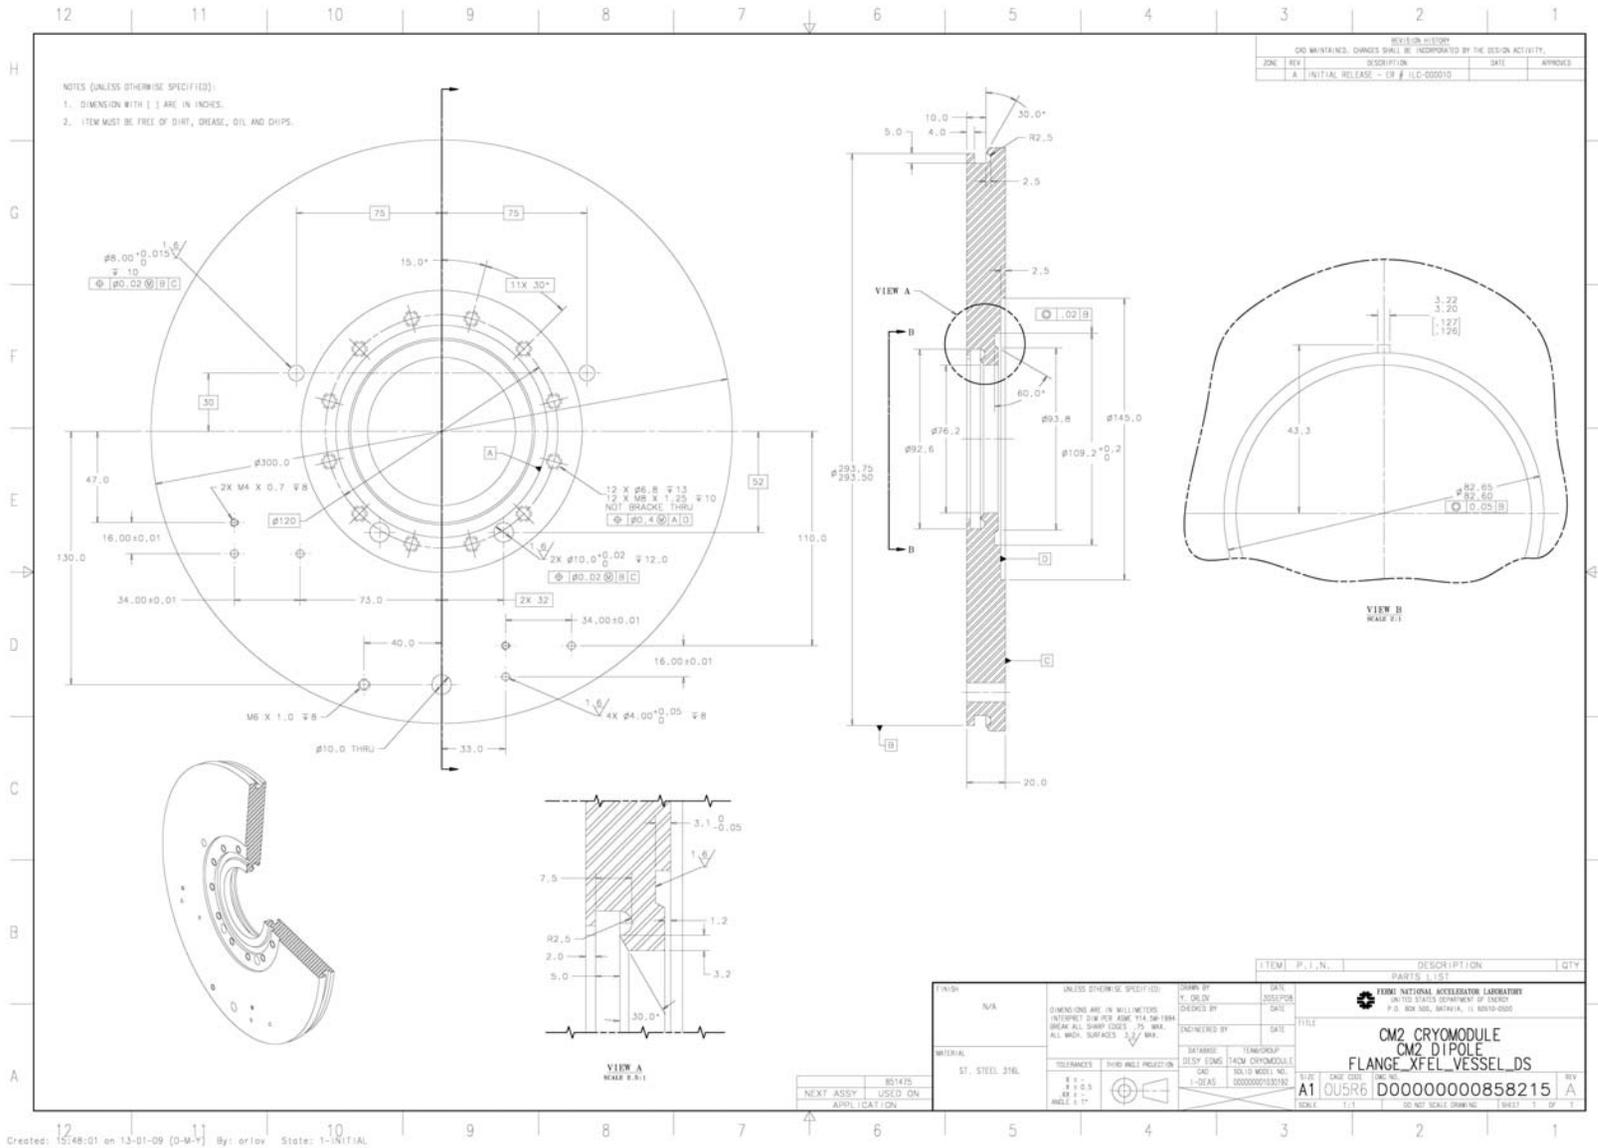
CM2 Flange XFEL Vessel Upstream (Drawing 858215)
